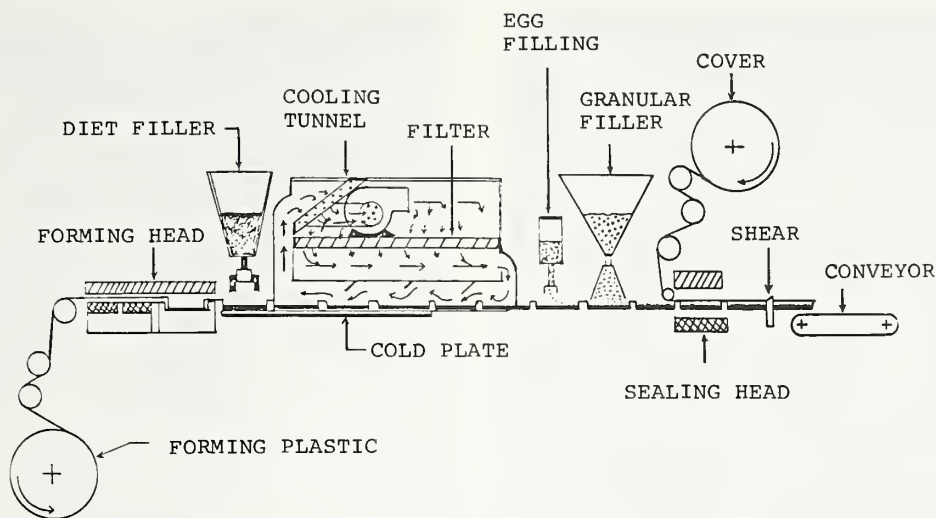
Schematic diagram of Kutter machine with auxiliary equipment for processing boll weevil rearing trays.
